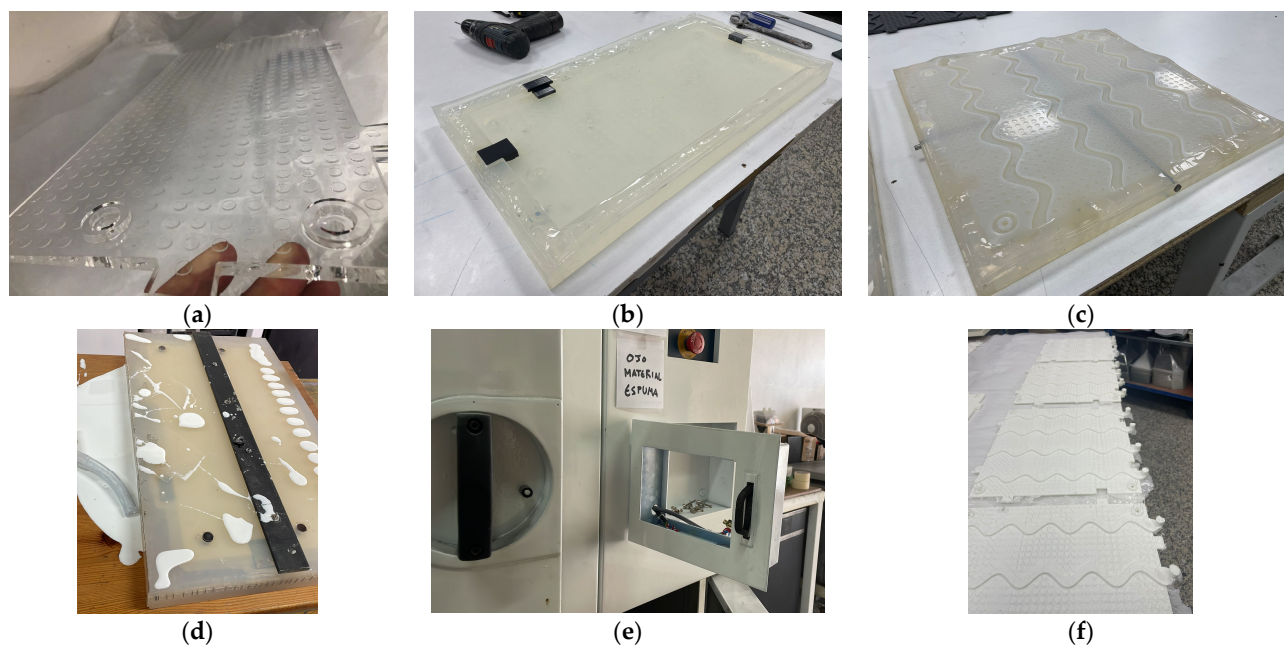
System manufacturing process: (a) master mold of a ramp; (b) silicone mold of a ramp; (c) silicone mold of a tile; (d) mixture poured into a silicone Id; (e) vacuum oven; and (f) resulting mixture extracted from the mold.
